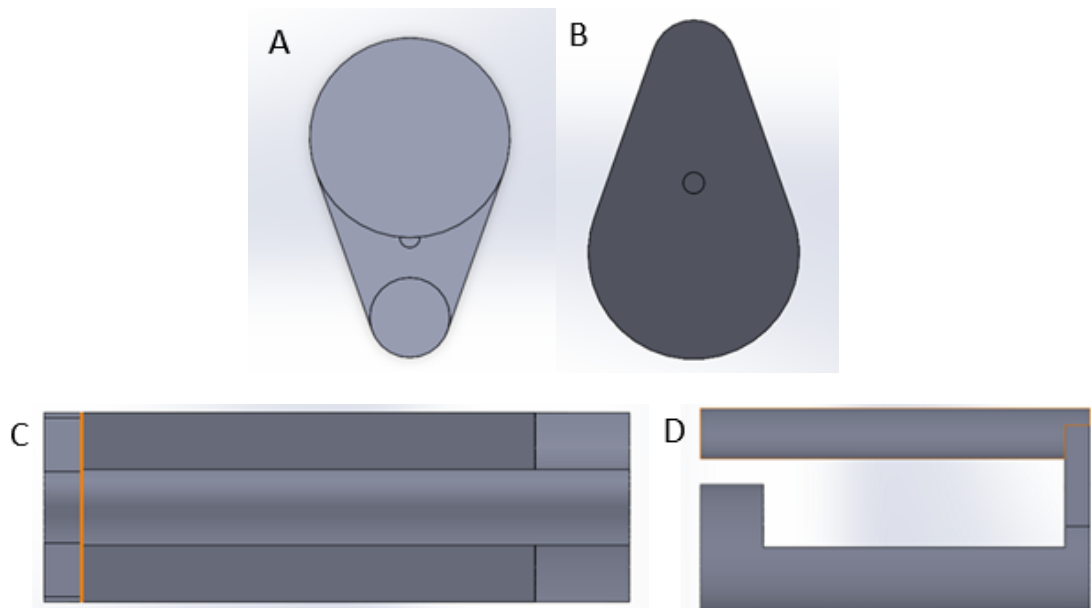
Push Part Design Made Using SolidWorks, A – Top View; B – Bottom View; C – Sideview Front; D – Side View
